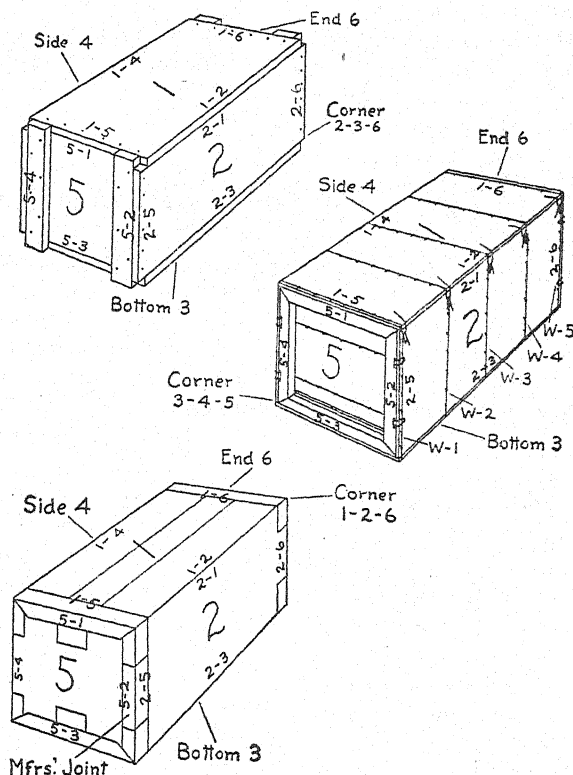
Identification of the Faces, Edges, and Corners of Test Specimen.
